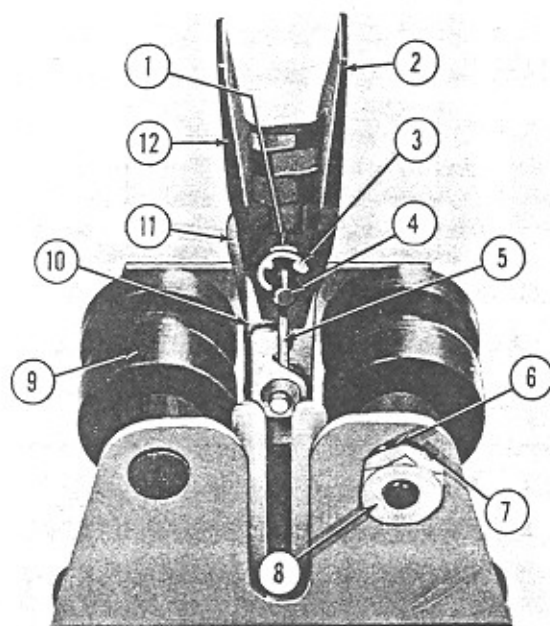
BRACKET AND ROLLER ASSEMBLY, LIFT ARM GUIDE
